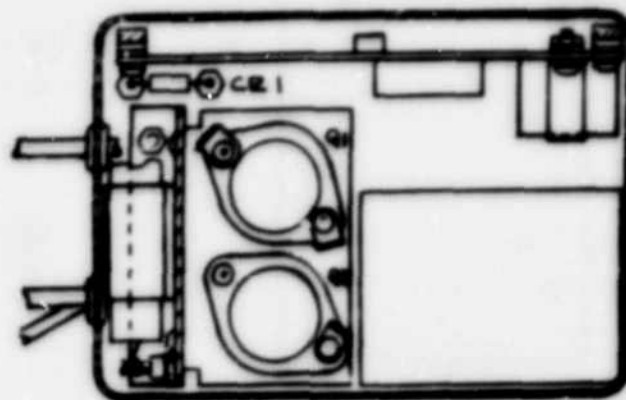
DC/AC Inverter Assembly Outline Drawing
